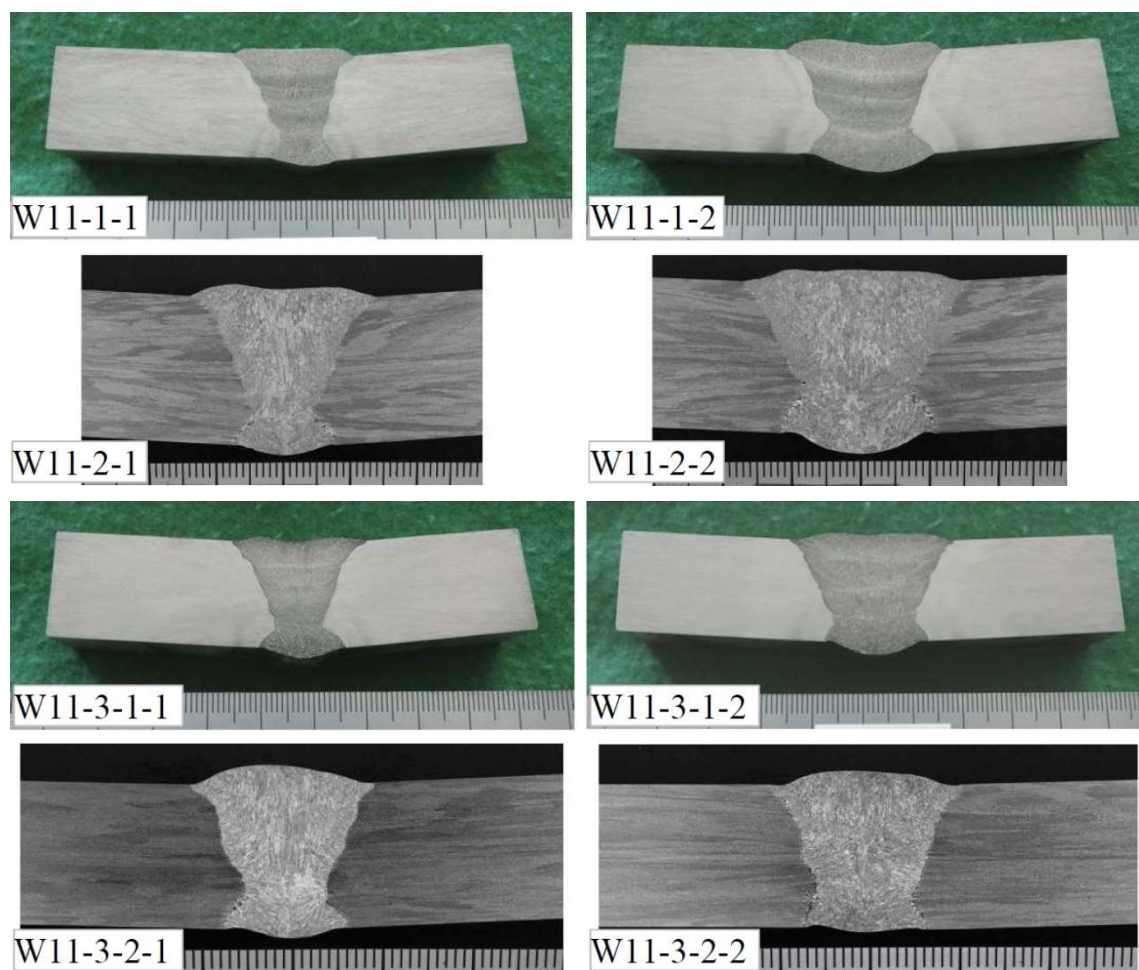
Macroscopic observation photographs of welded joint made of KSUS329J3L stainless steel.
